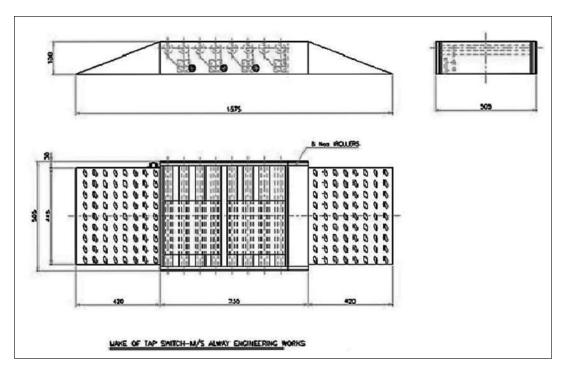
CAD Drawings after Fabrication of Conveyer Roller Mechanism; dimensions are in inches
